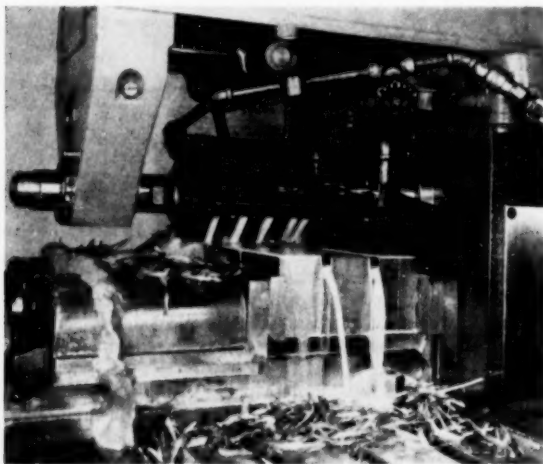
EXPERIMENTAL SLAB-MILLING SETUP FOR TOOL-LIFE TESTS
